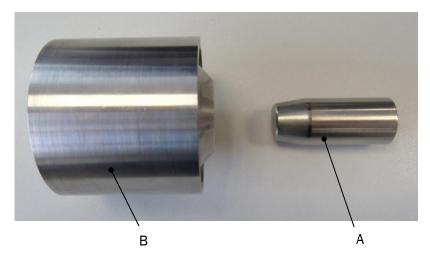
Assembly Tools, Assembly cone (A) and Assembly Anvil (B)
